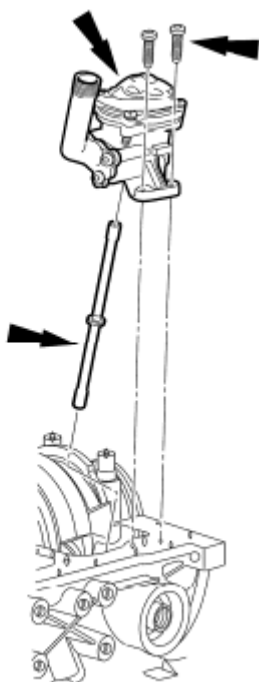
Locating Oil Pump Intermediate Shaft And Oil Pump Bolts
